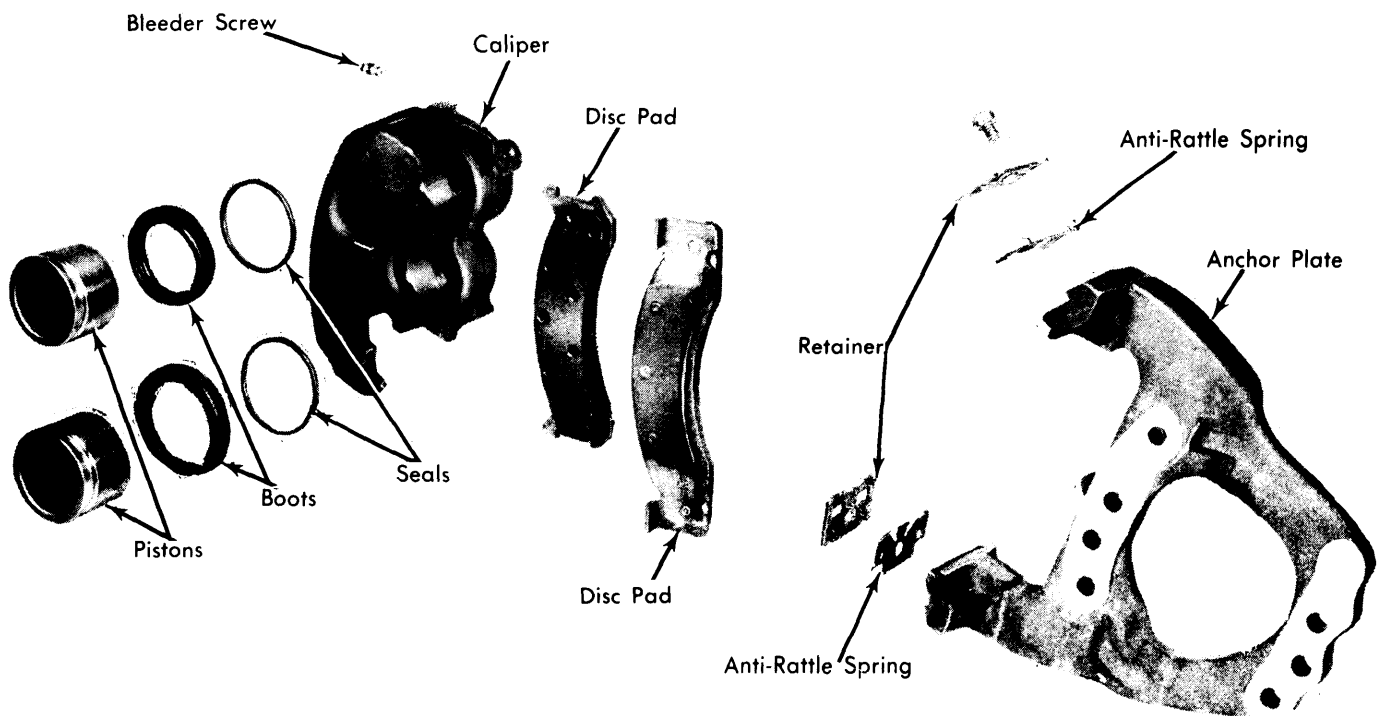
Exploded View of Two Piston Sliding Caliper Assembly
